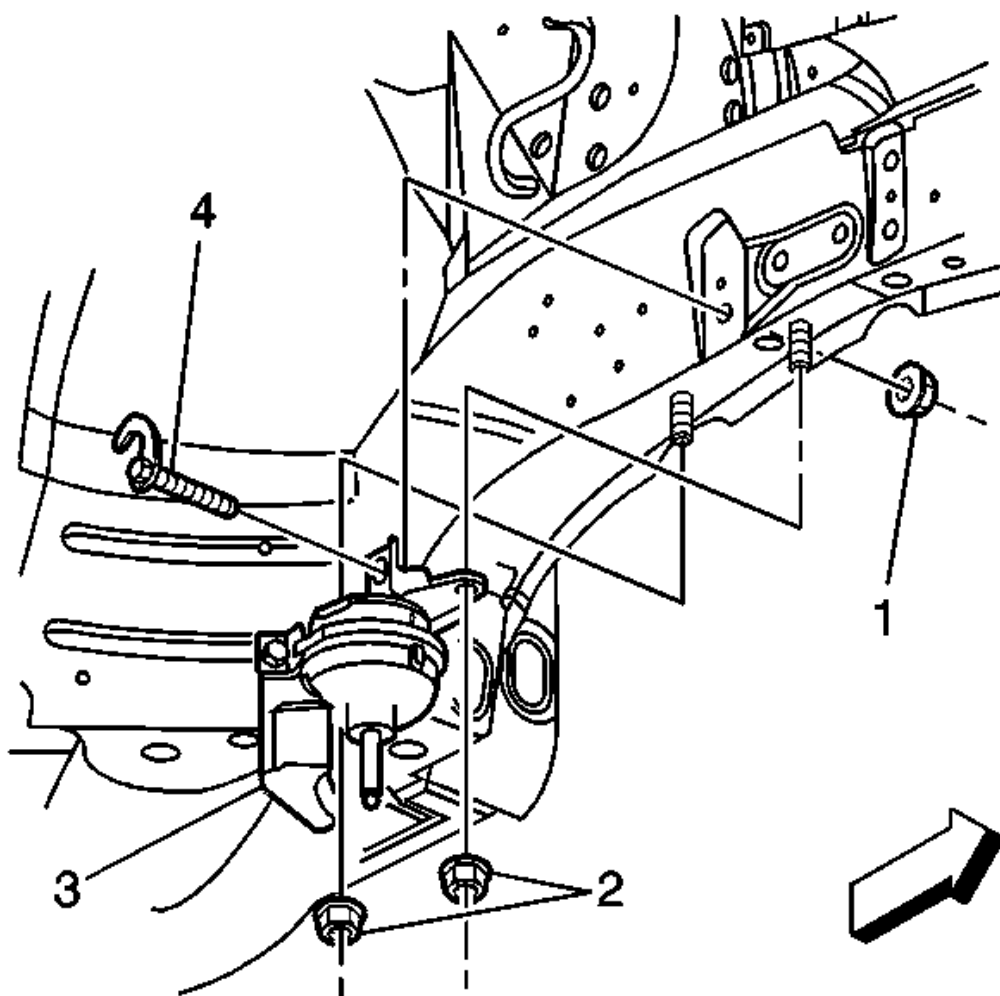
View of Bolt, Nuts, & Right Engine Mount
